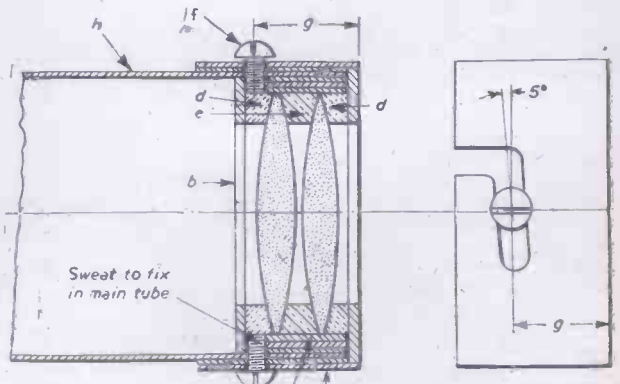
Eye-piece mounting and detail of bayonet fitting.
